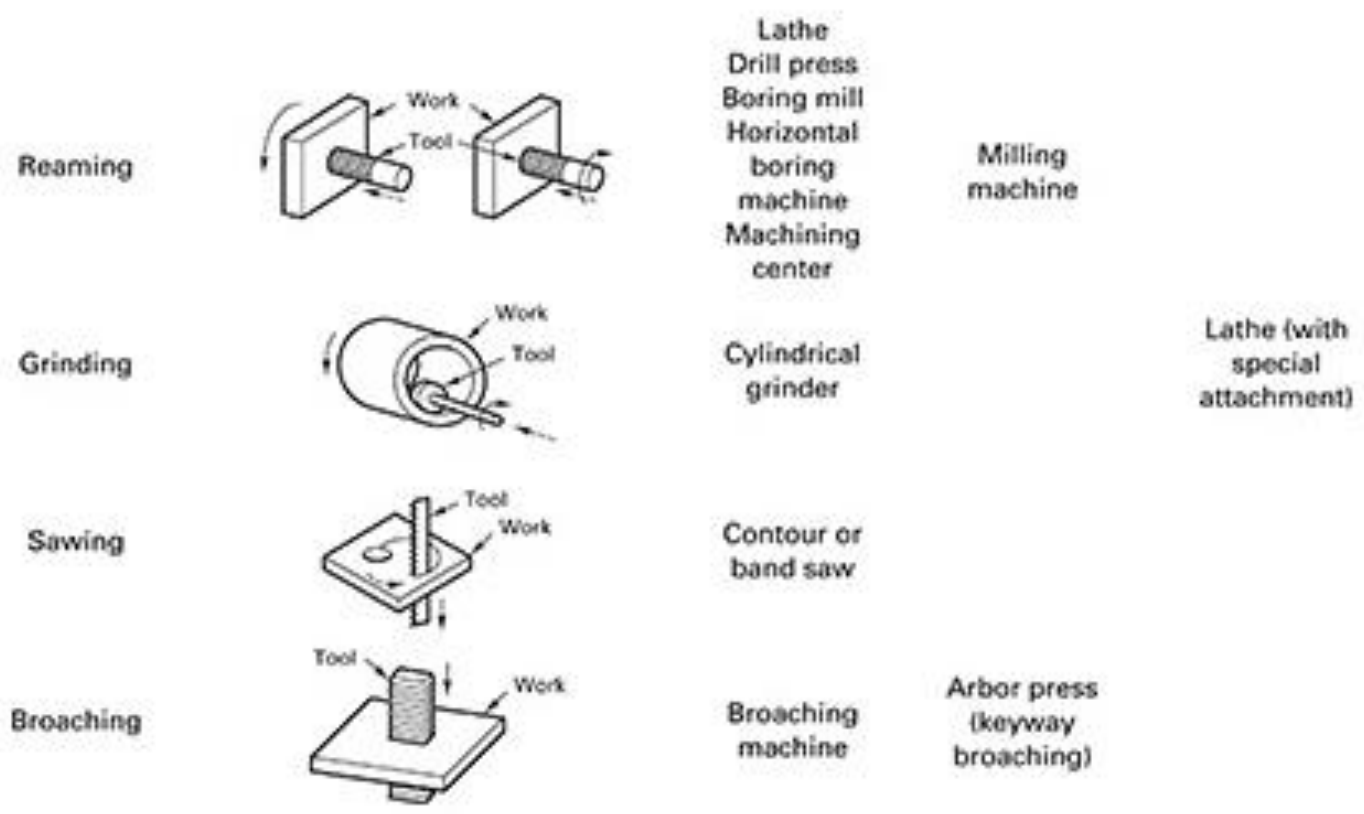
Operations and machines used for machining cylindrical surfaces.
